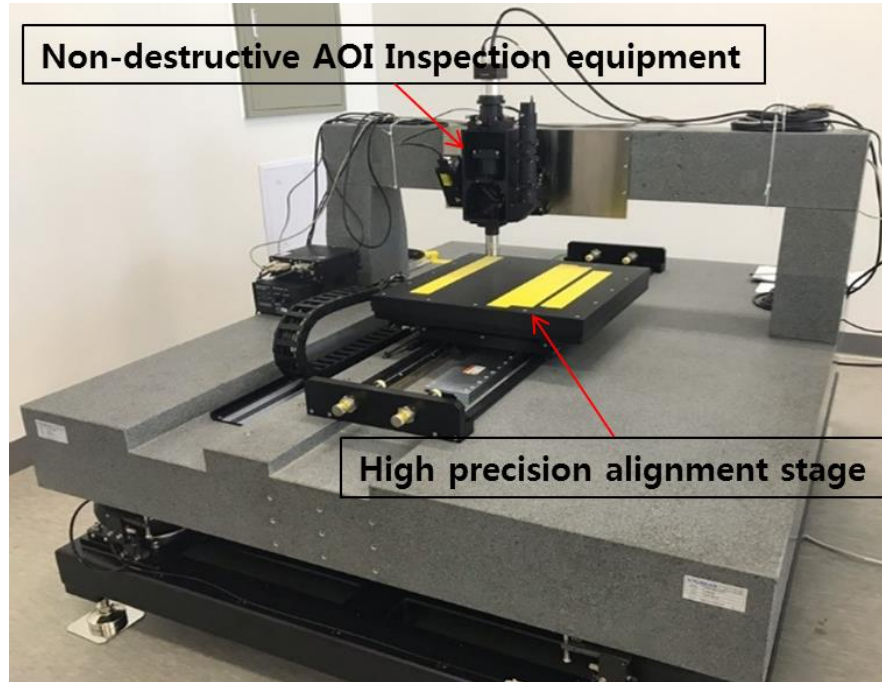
Non-destructive Inspection test bed for the secondary battery welding part
